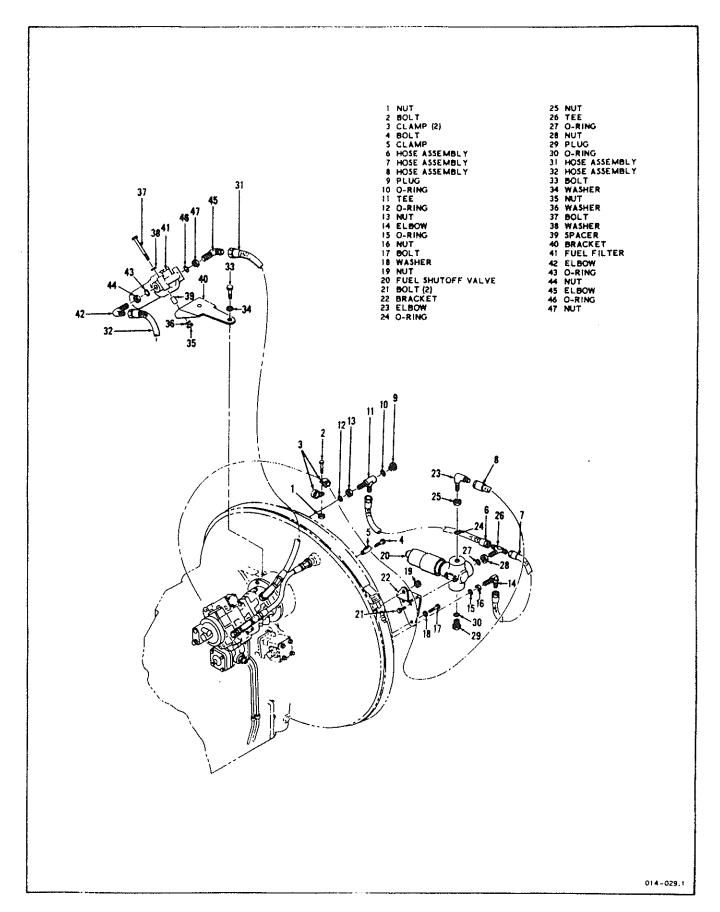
Fuel System Installation, Exploded View (Sheet 1 of 2)
